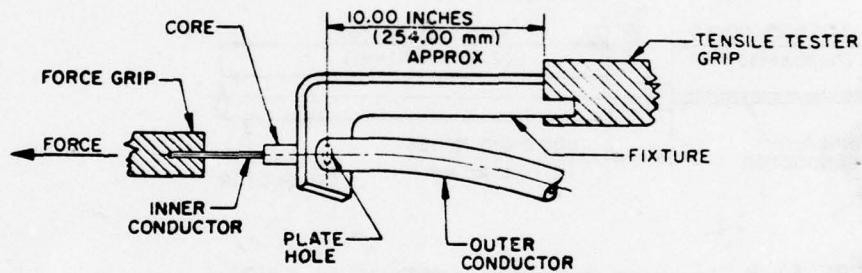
B Typical Test Fixture for Use with Semi-rigid Cables.
